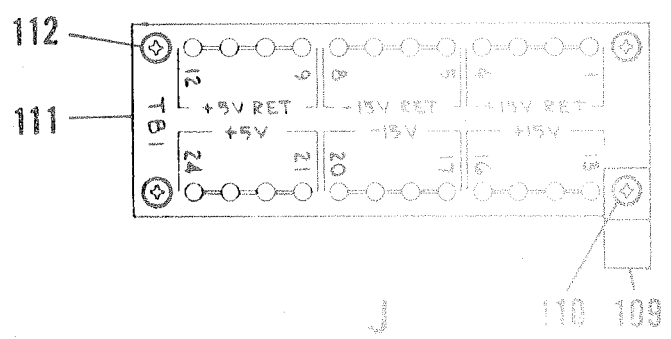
Test Set, Electronics Assembly (Sheet 5 of 6)
